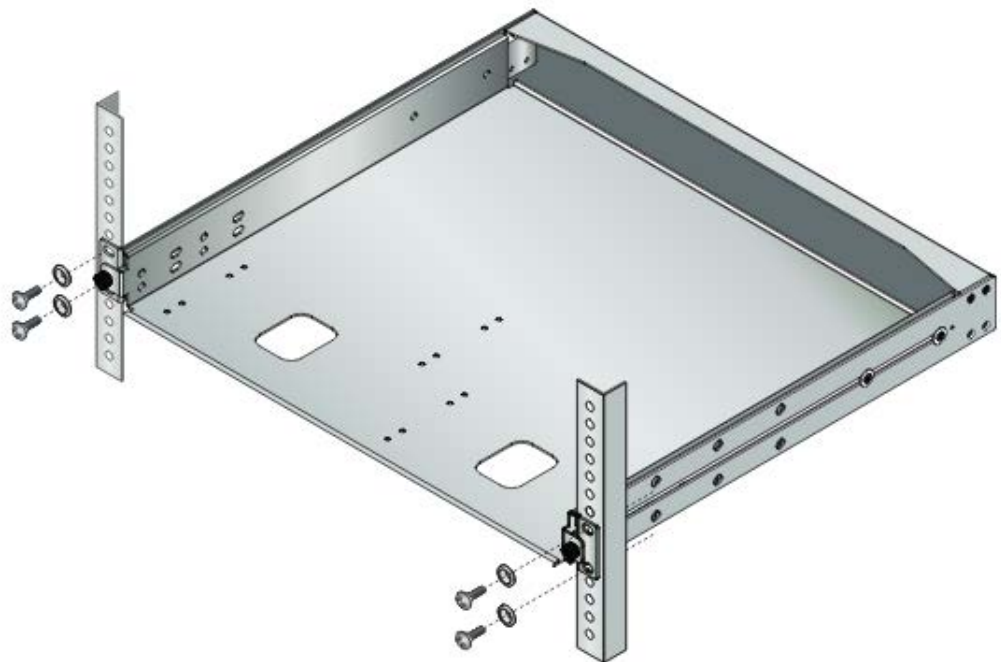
Installing the RKMT-J15 Tray in an Equipment Rack
